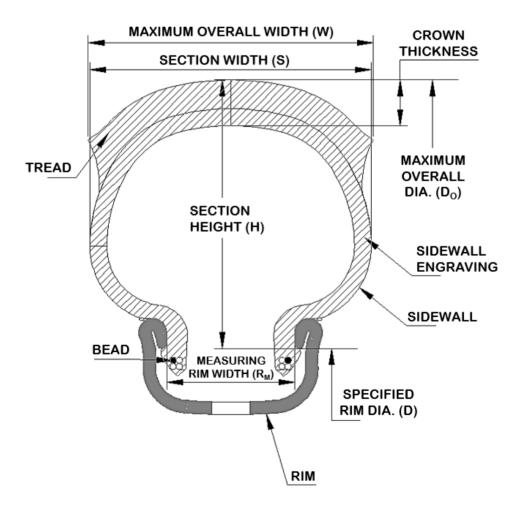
BEADED EDGE- TYRES MOUNTED ON HOOKED BEAD/EDGE RIMS
